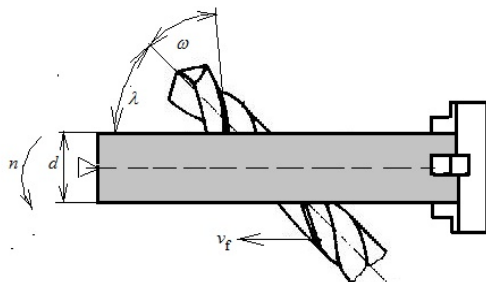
Alignment of a helical drill during turning with side cutting edge
